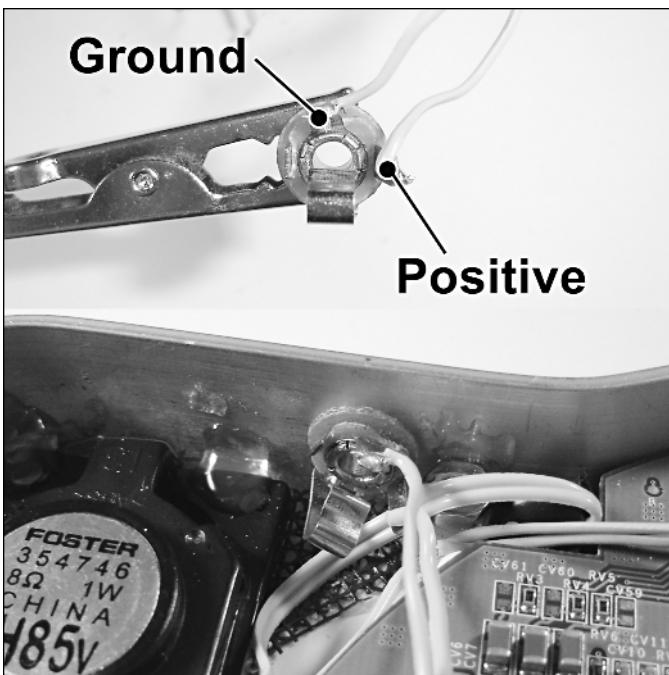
Wiring the charging jack and installing it in the unit.
